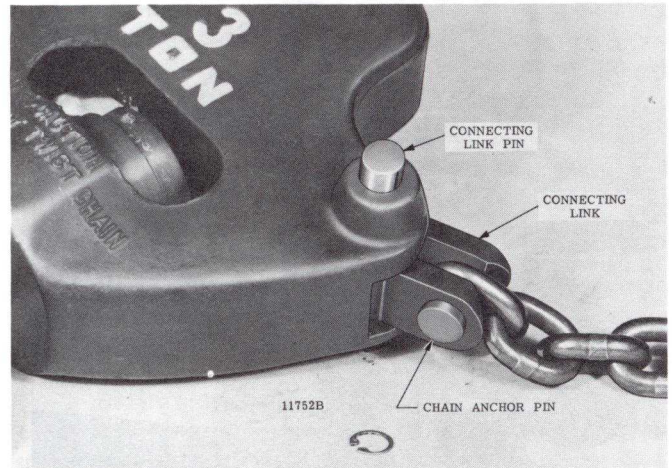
Removing Connecting Link Pin From 3 Ton Lower Block Assembly.
